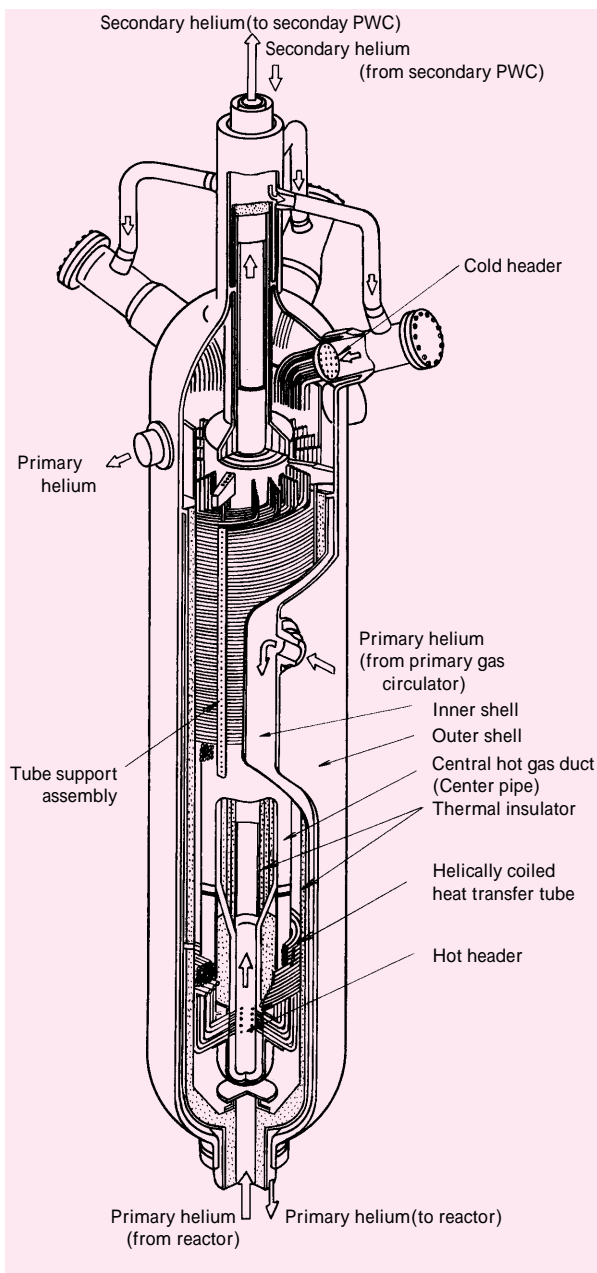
Cutaway view of the He/He intermediate heat exchanger of the HTTR.
